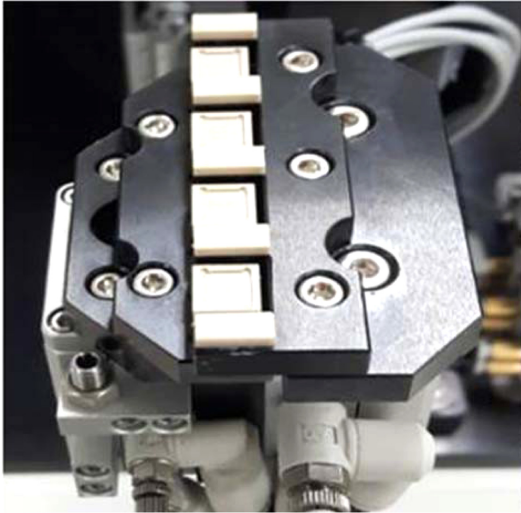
A photograph of inspection parts manufactured with single-unit probe structure.
